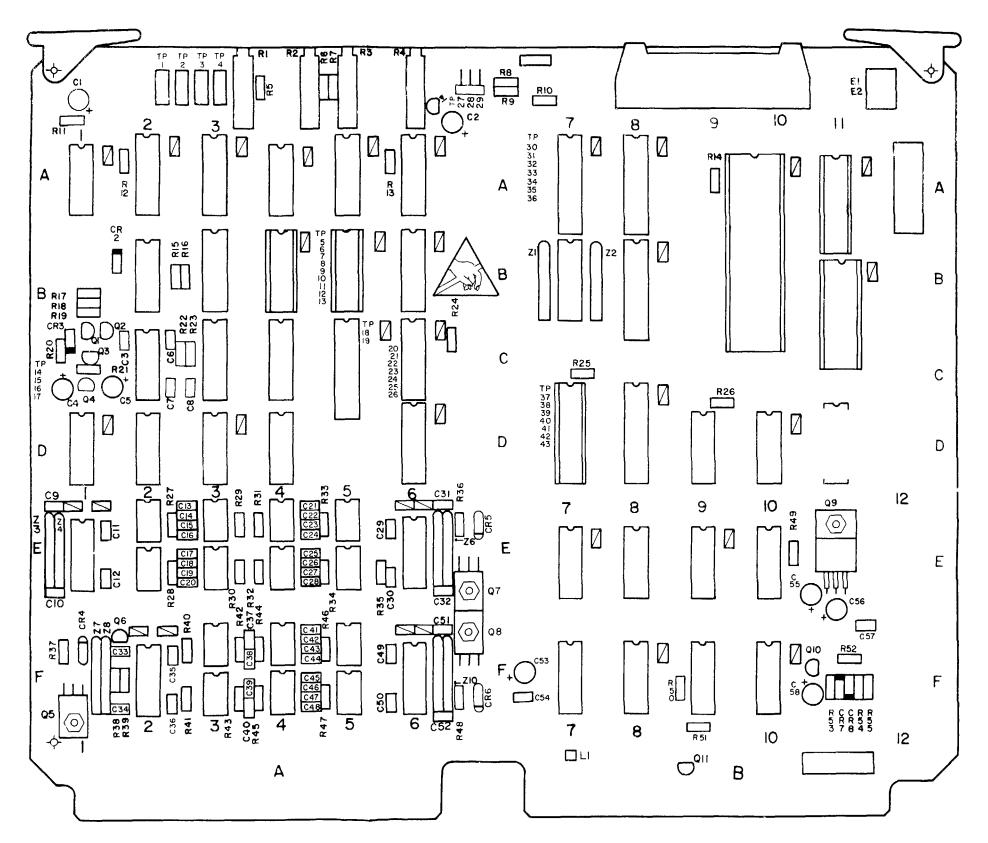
Reference IEEE Board 2225-2703 Assembly Drawing
